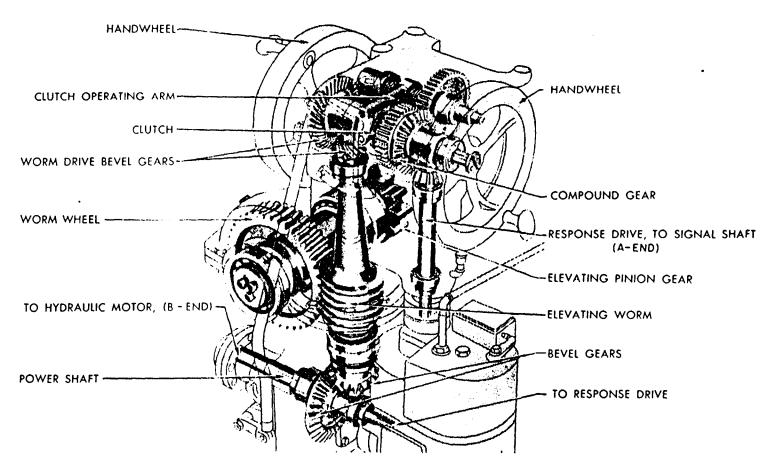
Elevating mechanism, 6-inch gun barbette carriage M1.
